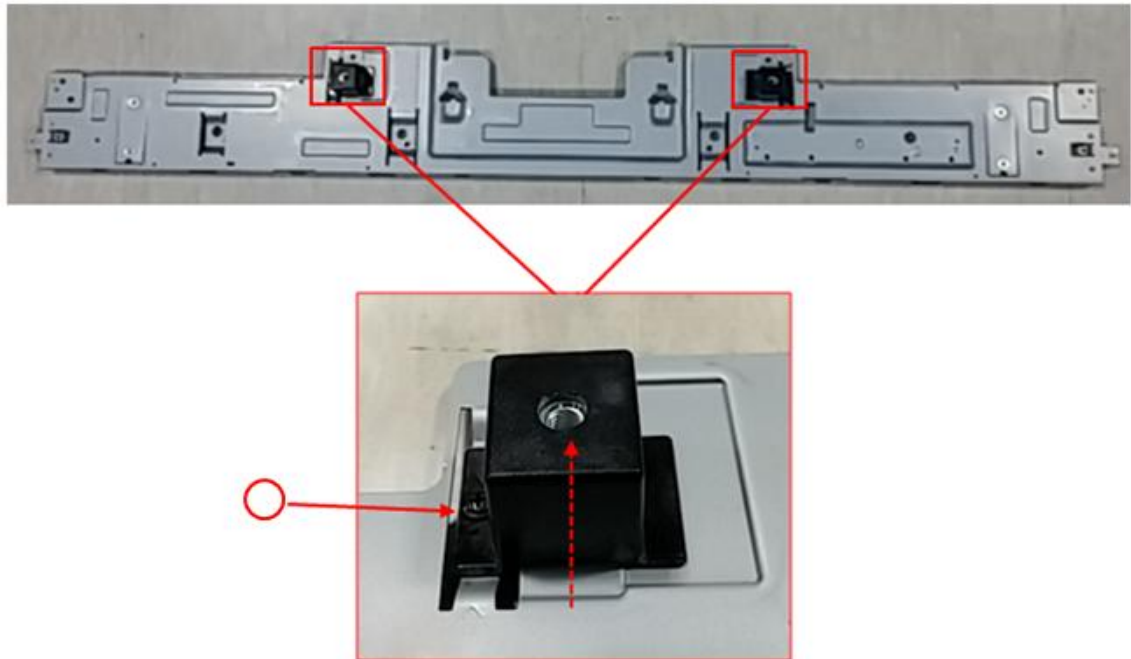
Remove Screw 2EA, Disassemble Mold cover
